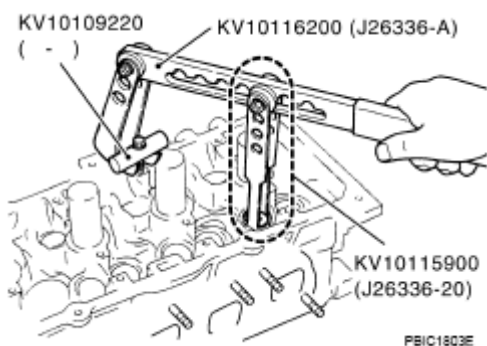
Compressing Valve Spring With Valve Spring Compressor
